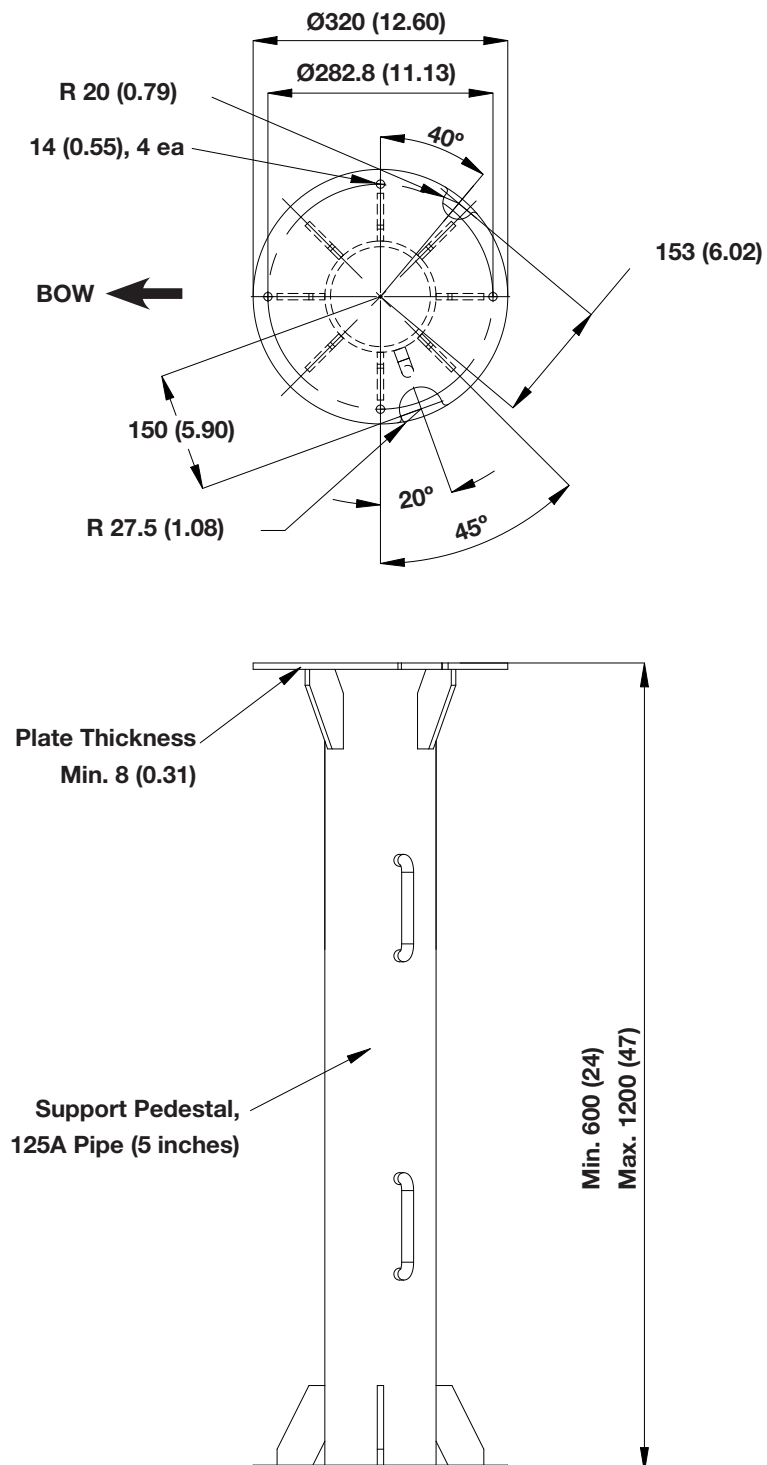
Recommended Mast Design using Outer Holes (with M10 Bolts)
